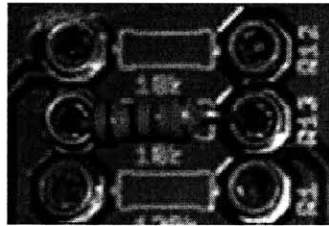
Photograph of the component sockets to be used in the laboratory kit “permanent topology” design. Components critical to system design will not be soldered in directly. Instead, they will be selected by students and placed in sockets as shown.
